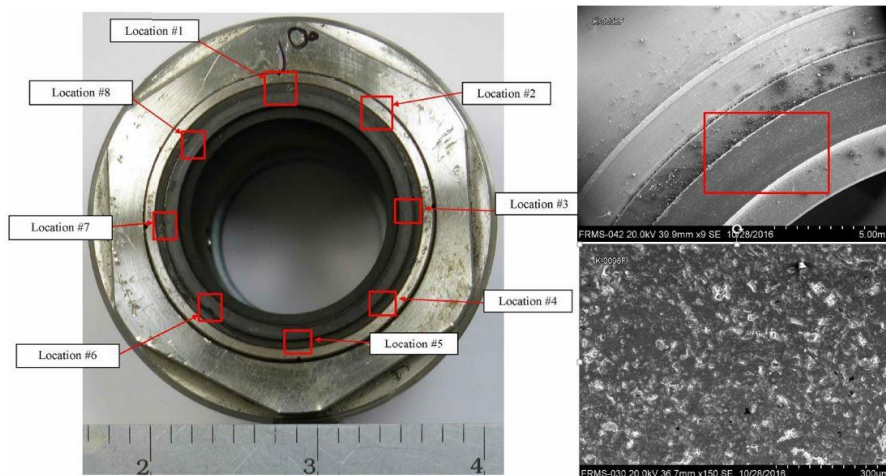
ACD Pump Mechanical Seal Stationary Face. The scale for these images is 1/8-inch (left), 5-millimeters (top right), and 300-micrometers (bottom right).
